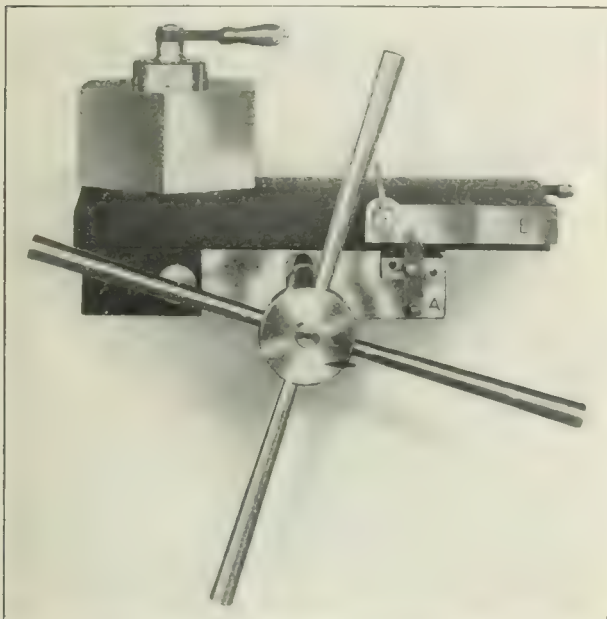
New Turret Slide Made by the John B. Morris Machine Tool Company, Cincinnati, Ohio.
